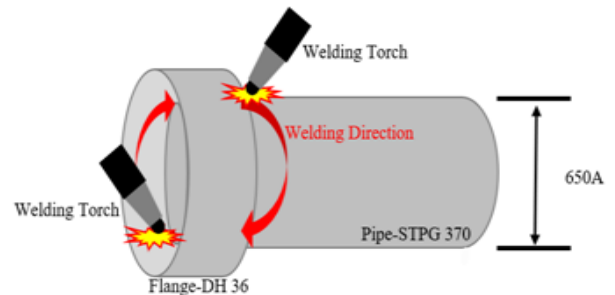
A schematic diagram for pipe-flange weld process
